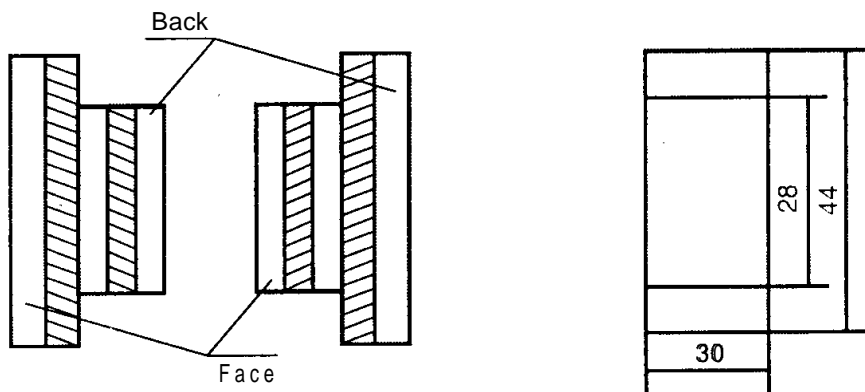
The shape and dimensions of bond strength specimens for multi-layer plywood
